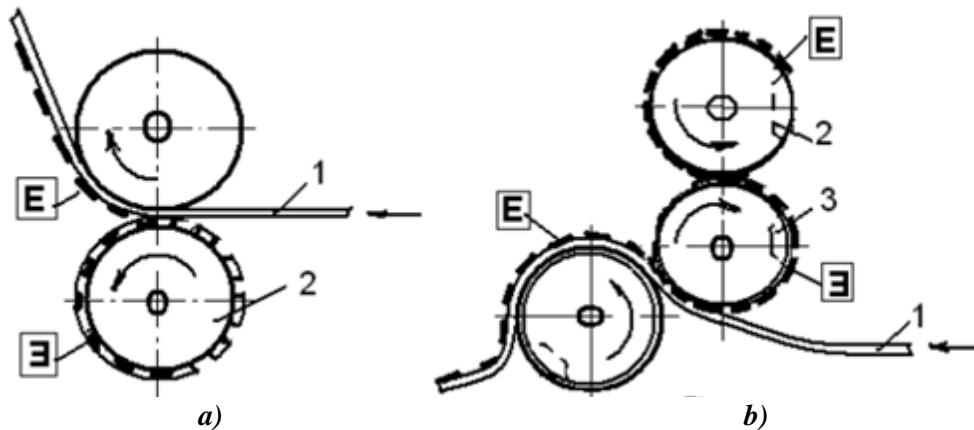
Schemes of ink transfer from the printing plate to the paper:
